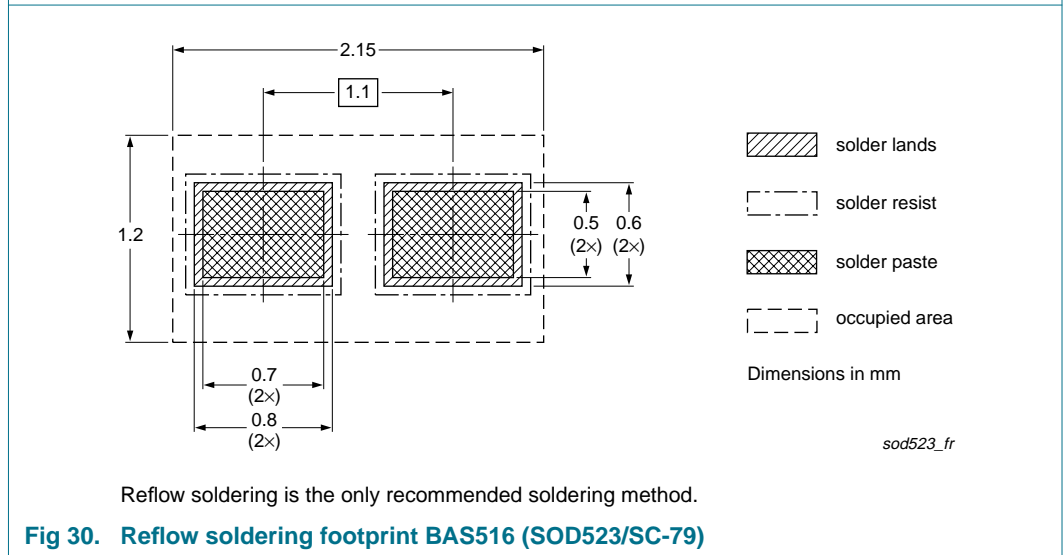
Reflow soldering footprint BAS516 (SOD523/SC-79)
